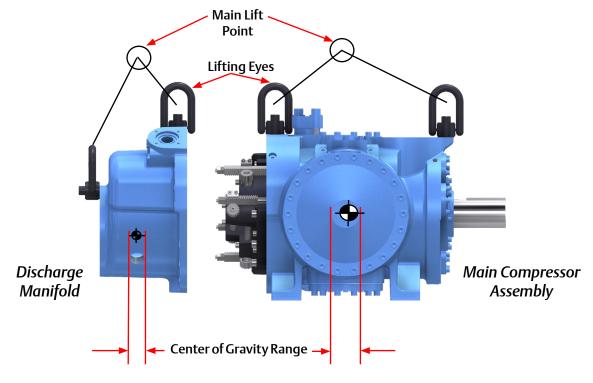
Bareshaft Compressor Center of Gravity - Discharge Manifold and Main Compressor Assembly (Models 291-601)
